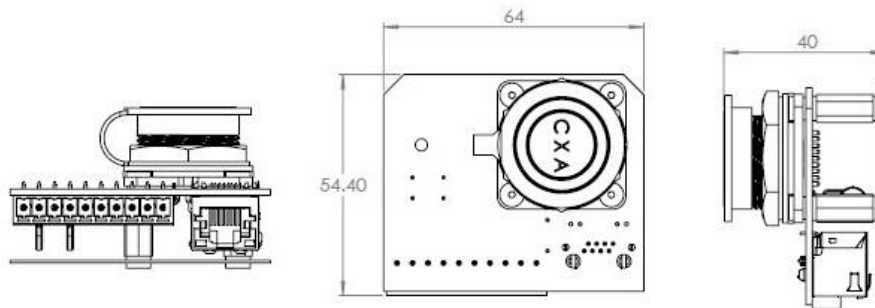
Patch Board Mk2 Dimensions (mm)
